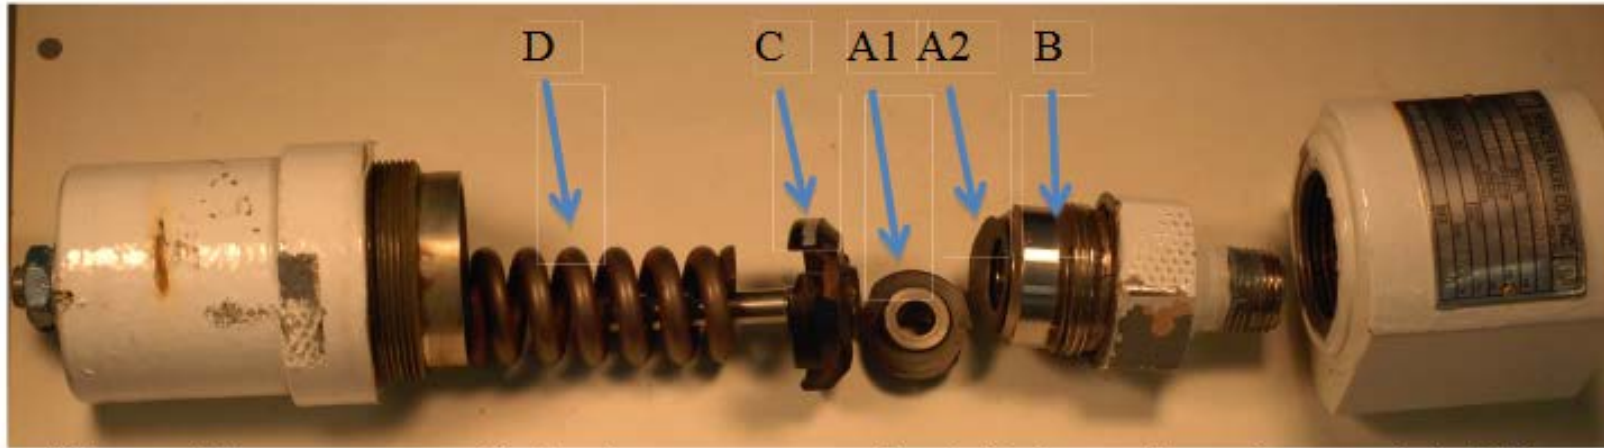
pressure relief valve components: failed nozzle subassembly (A1 and A2); inlet base (B); disk subassembly (C); set spring (D).
